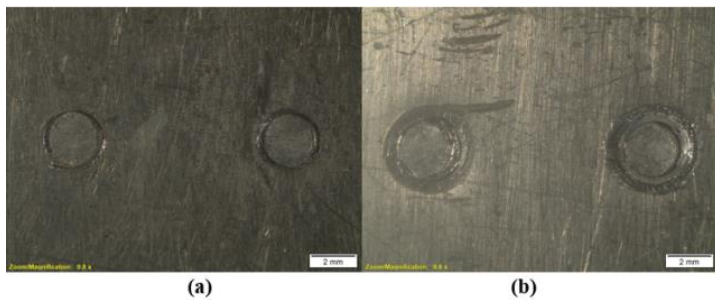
Top view of macro test results (a) drill (b) FSSW.
